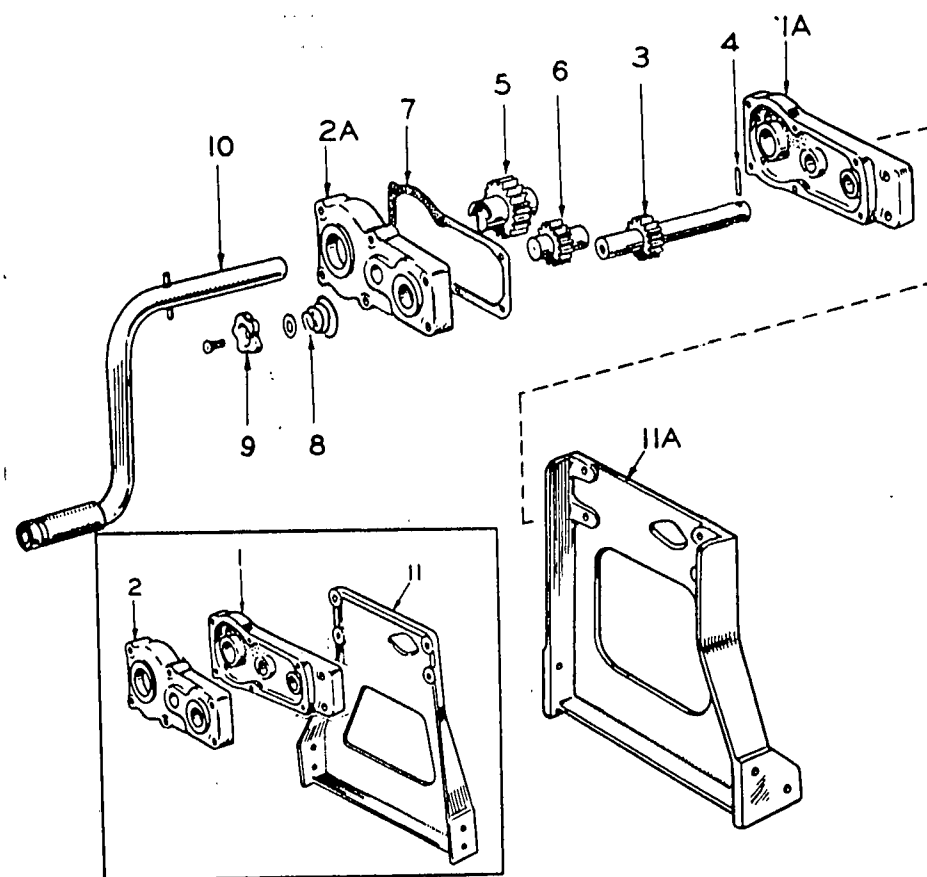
GEARED HAND CRANKING STARTER GROUP
